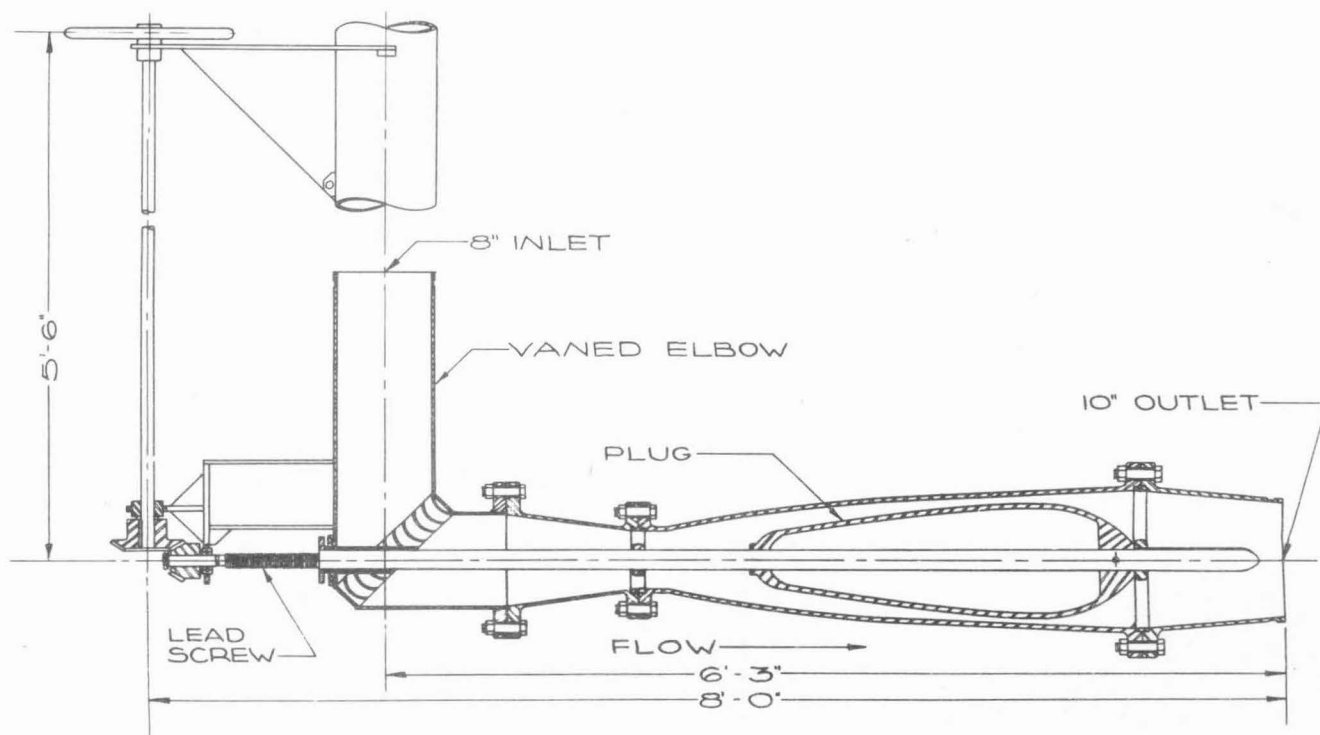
CROSS SECTION OF THROTTLE VALVE
